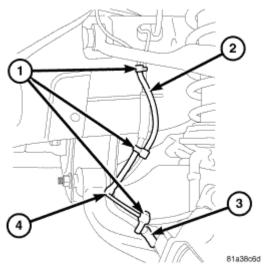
Identifying Line/Hose, Brake Hose Banjo Bolt, Wheel Speed Sensor Routing Clips & Hose Courtesy of CHRYSLER LLC
